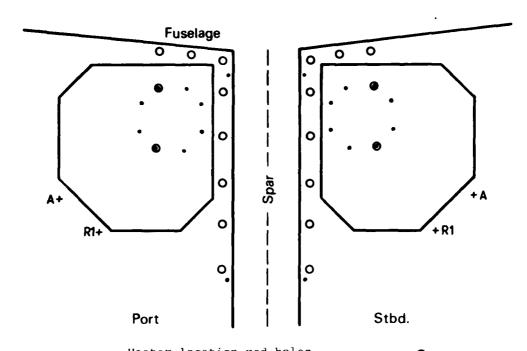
Locations for thermocouples for preheat drying. Also shown are the heater location rod holes.
